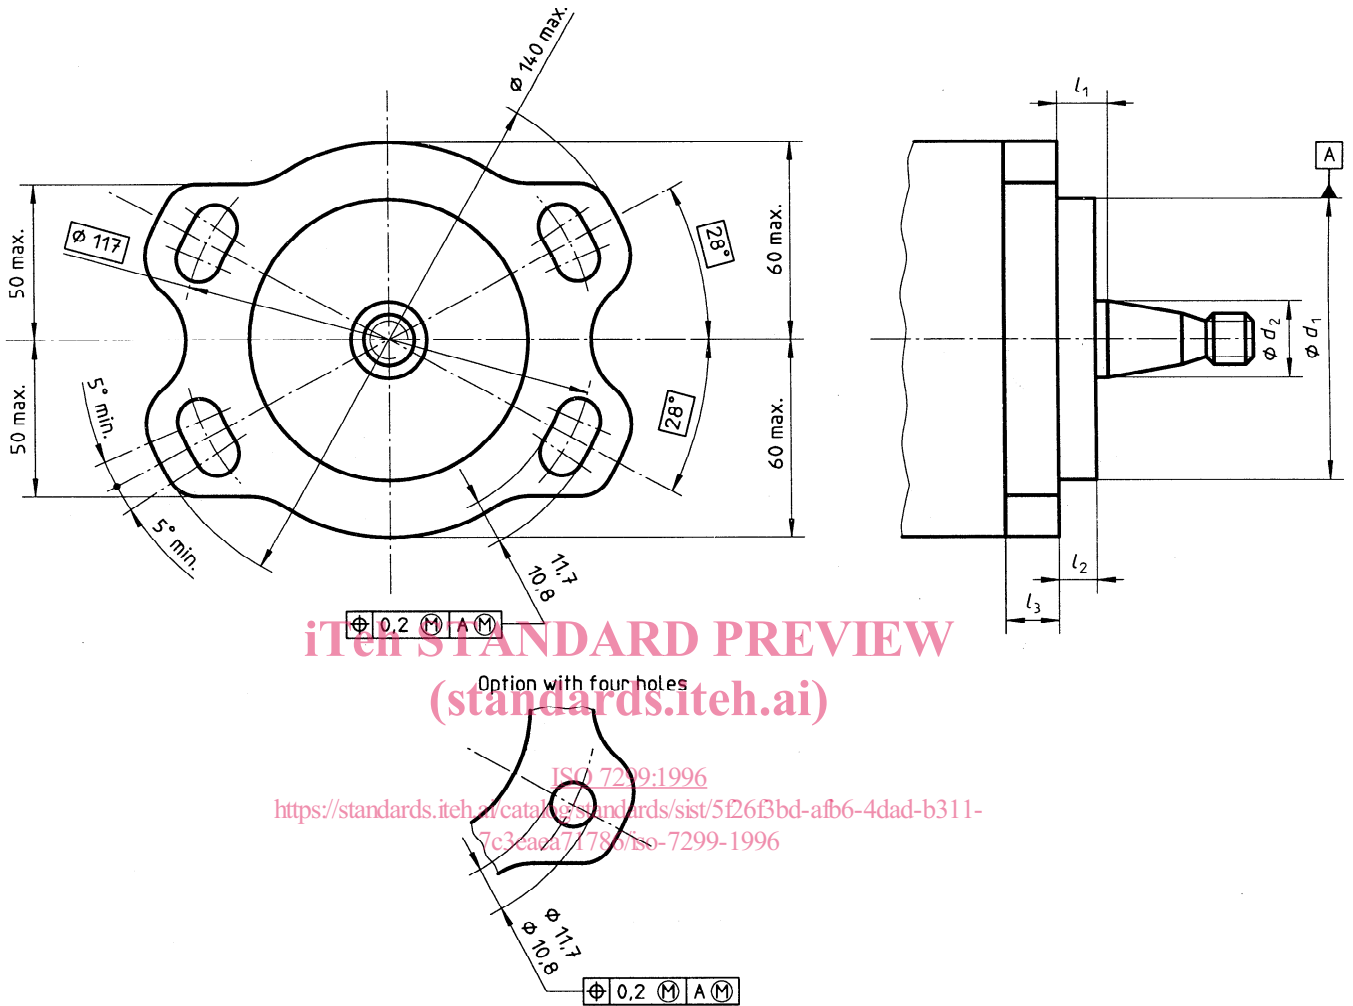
Rotary and distributor fuel injection pumps — Type 9 end-mounting flange
